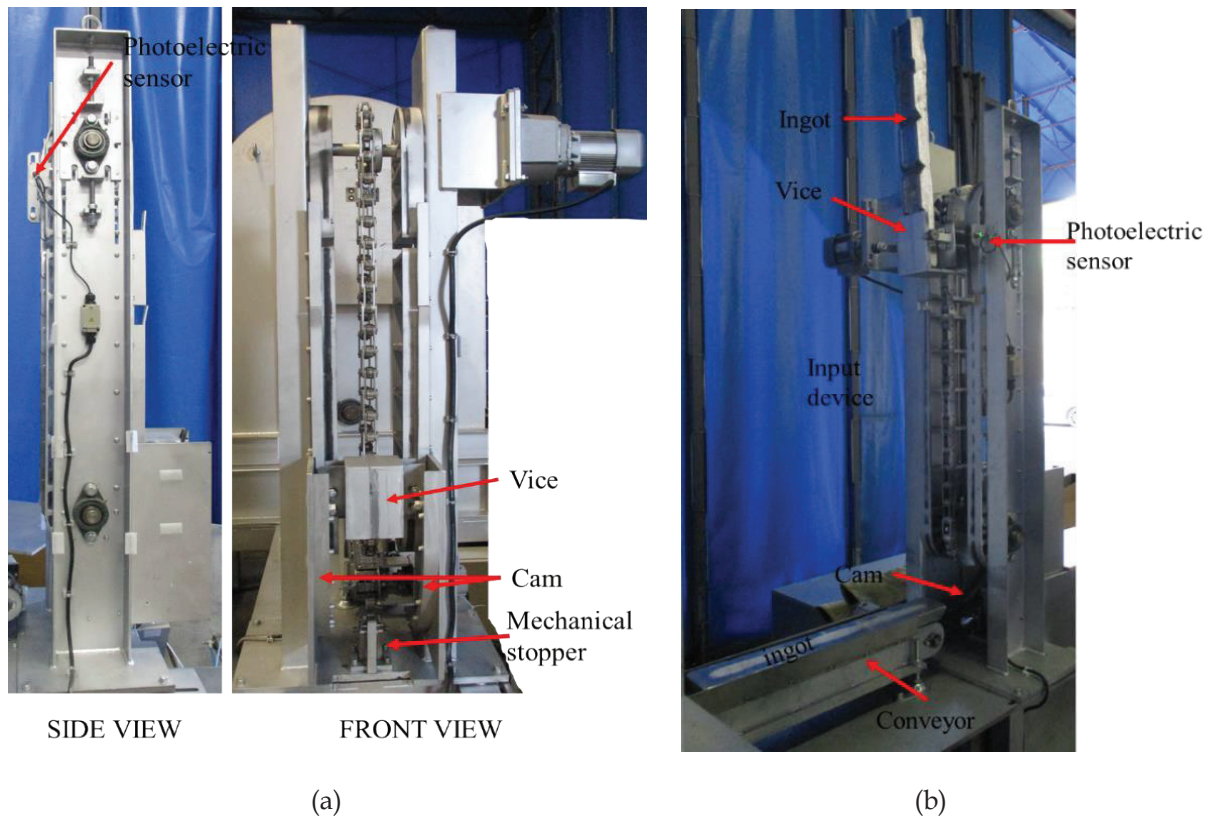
(a) Assembled input device, and (b) Testing the unit
